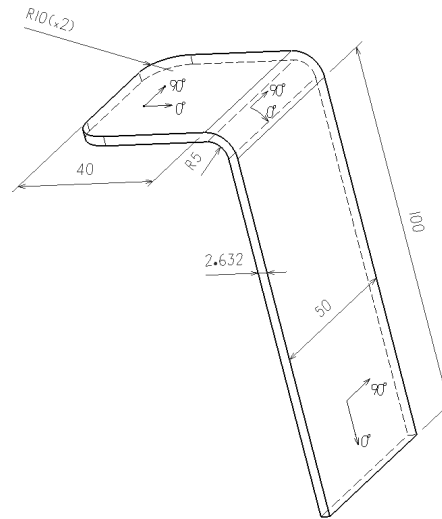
Geometry and dimensions of the specimen (all dimensions in mm)
